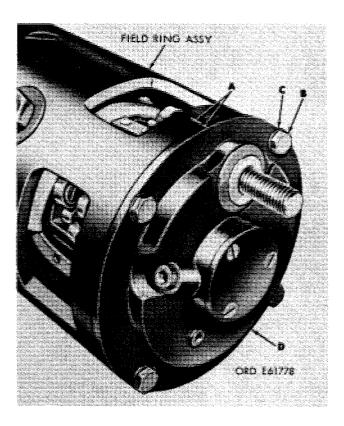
Removing or installing brush rigging assembly attaching parts.
